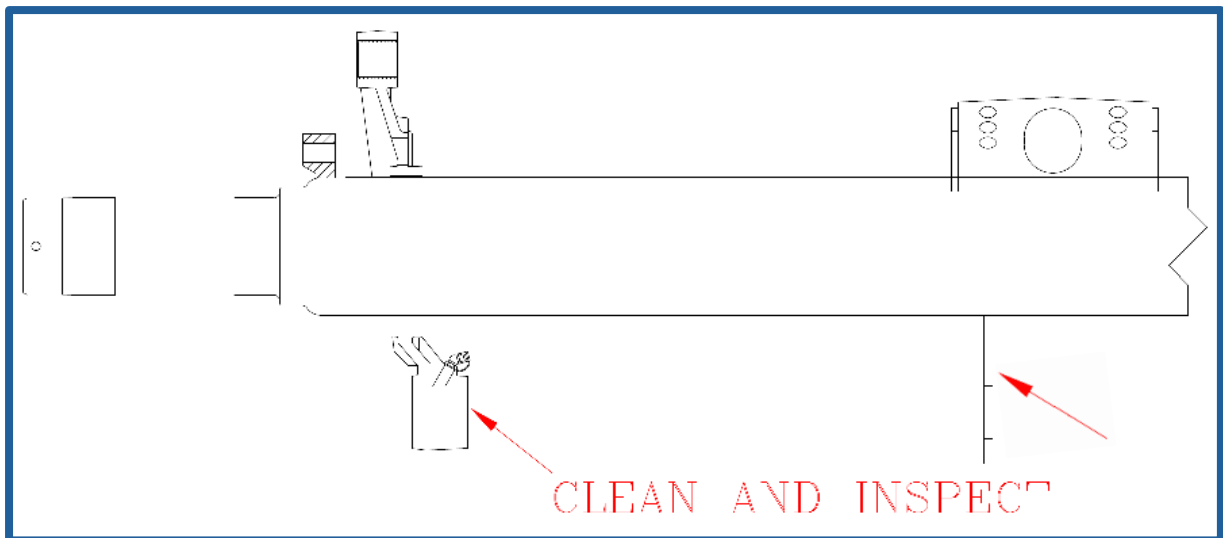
Clean and Inspect S Cam Bore and S Cam Mounting Bracket
